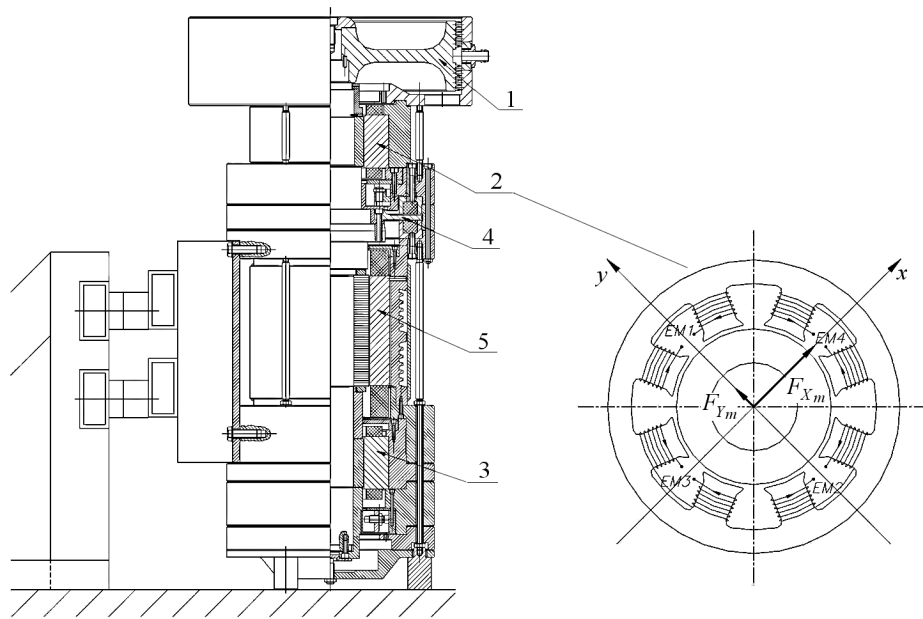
A schematic view of the test rig and the magnetic journal bearing
